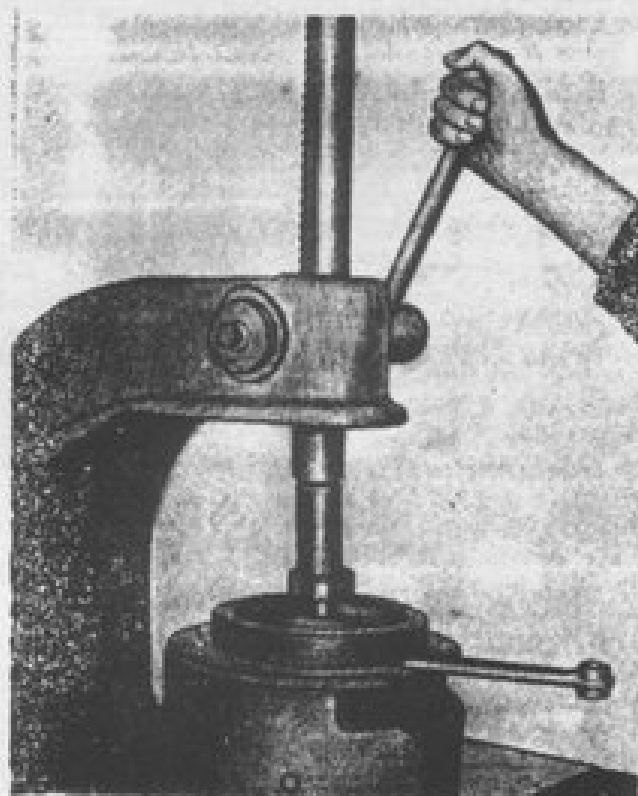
Pressing the bearing onto crankshaft half axle, ИЖ-П-3 motorcycle.
